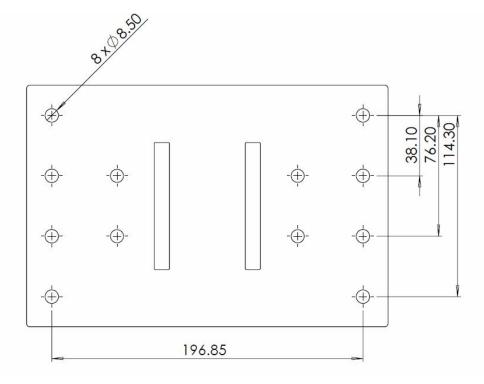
Fixture base plate (#KGTP): adapter to place and hold the S1780 on the rails. This part comes with the railing system accessory, or can be purchased separately.
